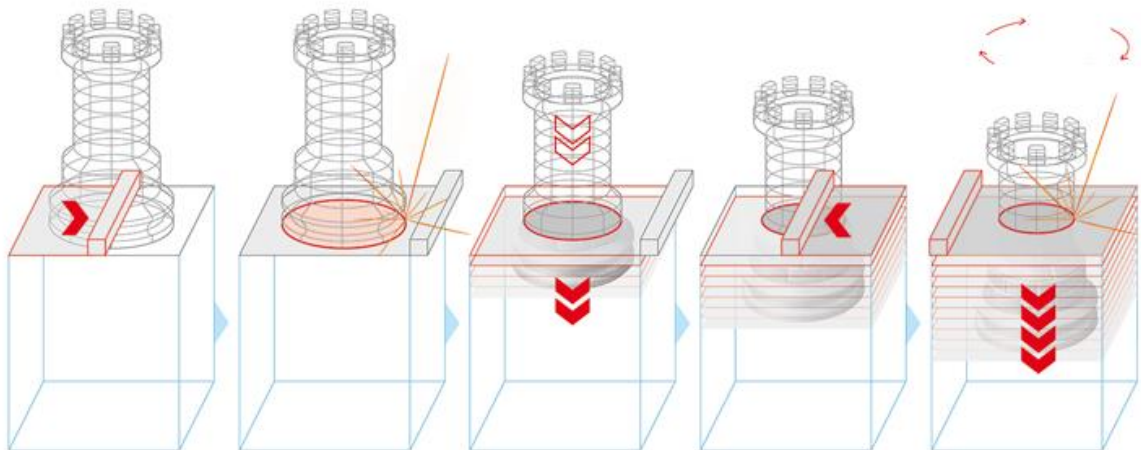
SLM machine layout (Zhang, Dembinski & Coddet, 2013, p. 22).
